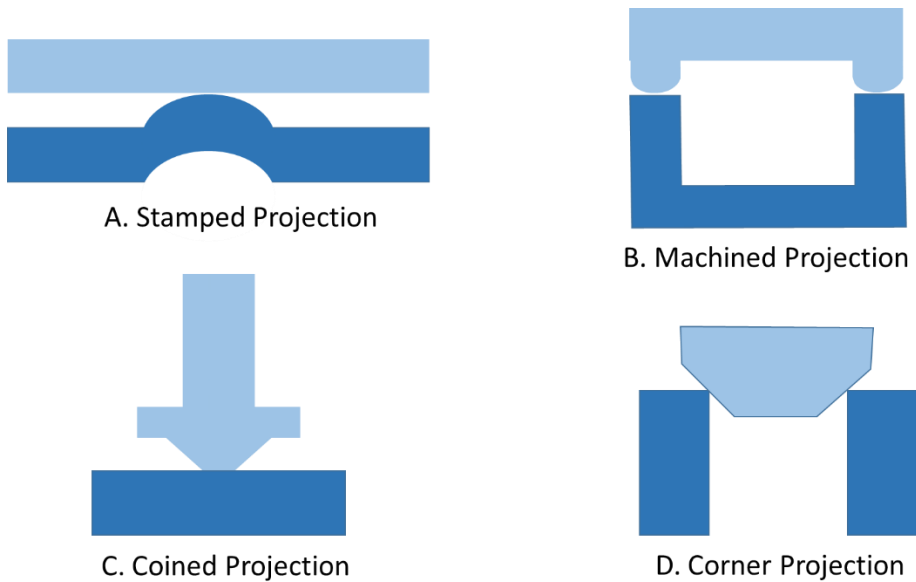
Schematic sections of four types of projection welds. Machined and corner projections are common in applications for circumferential welds leading to a hermetic joint.
